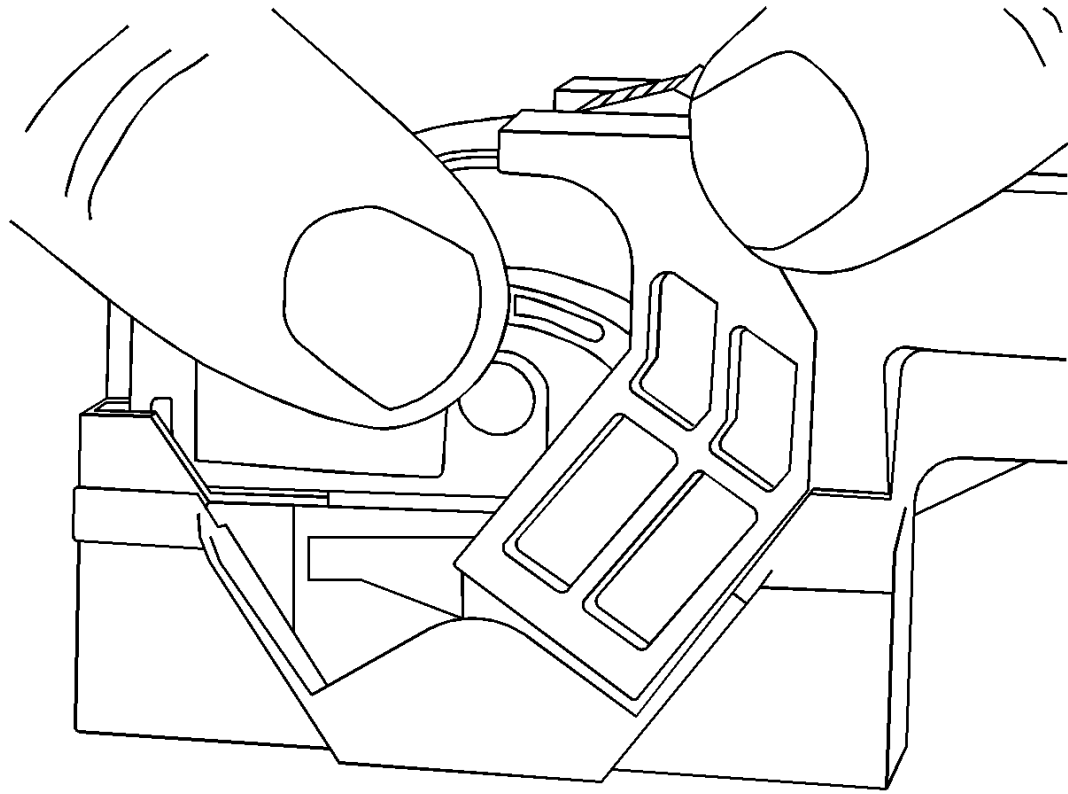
Locating Locks On Both Sides Of Wiredress Cover
